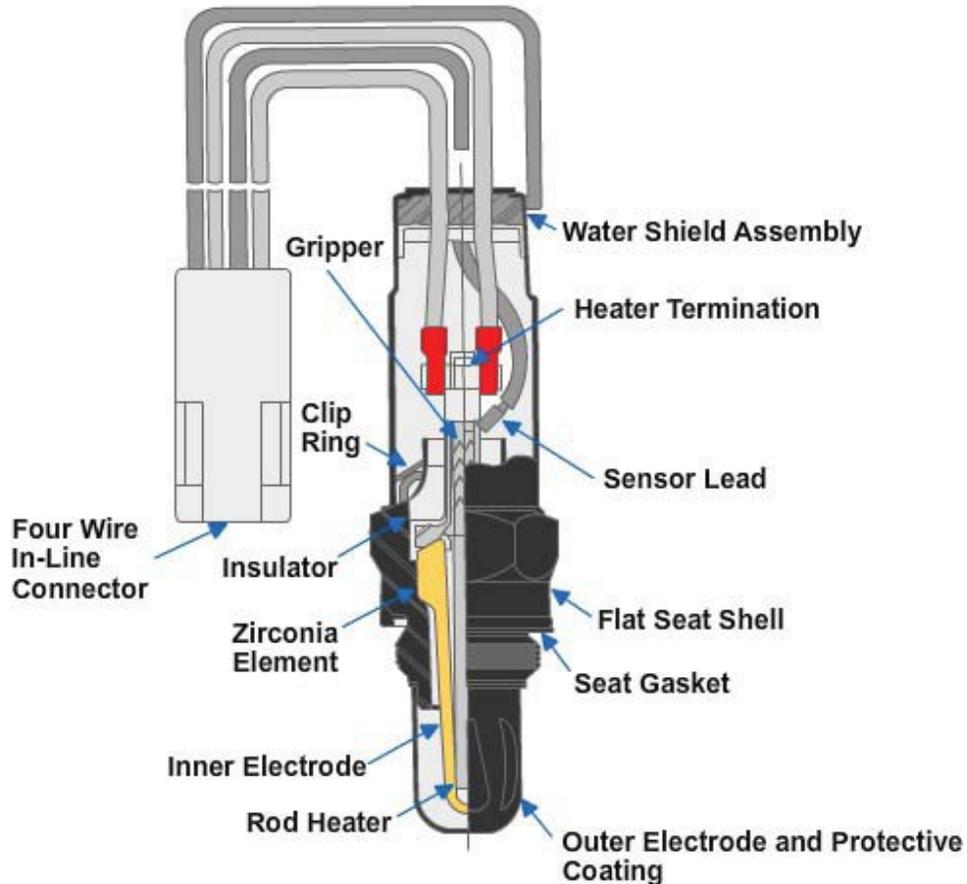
Cutaway view showing the internal parts of a heated zirconia oxygen sensor.
